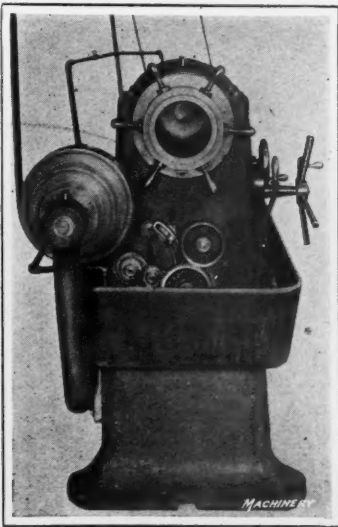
End View of the Biggs-Watterson Thread Milling Machine
